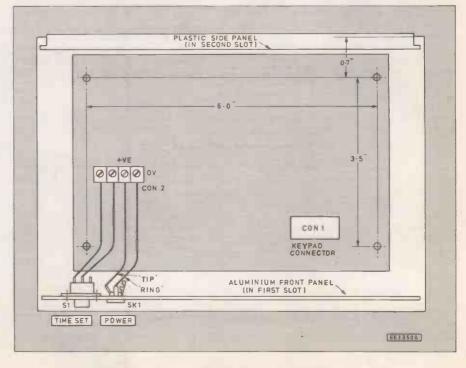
Mounting the p.c.b. and CON.2 wiring.
